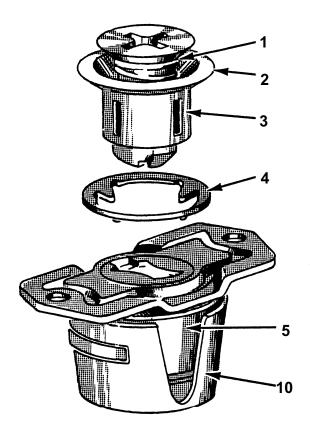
shows the parts that make up an Airloc fastener. Similar to the Camloc fastener, the Airloc fastener consists of a receptacle, stud, and cross pin. The stud is attached to the access panel and is held in place by the cross pin. The receptacle is riveted to the access panel frame.
